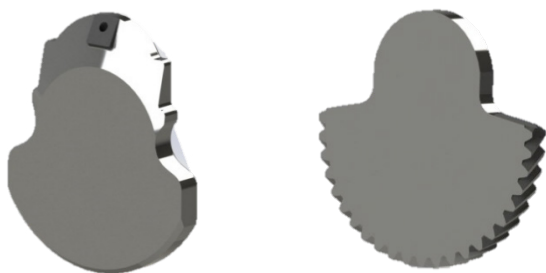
(a) Design of the original Crankweb (b) Design of the Modified Crankweb
